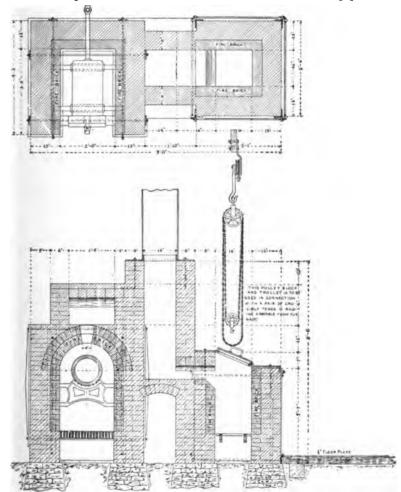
HORIZONTAL RETORT AND MELTING FURNACE FOR SILVER MILL.
